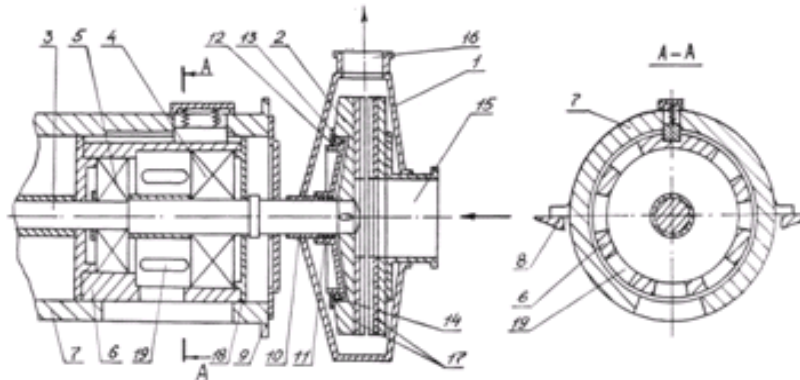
Mill with a passive rotor ABD: 1 - grinding chamber; 2 - rotary disk; 3 - shaft; 4 - radial bearing; 5 - thrust bearing; 6 - a glass; 7 - case; 8 - bed; 9 - a cover; 10 - sleeve; 11 - spring; 12 - ring; 13 - conical surface; 14 - balls; 15, 16 - nozzles; 17 - headset; 18 - surface of the housing; 19 - cutouts of the glass.
